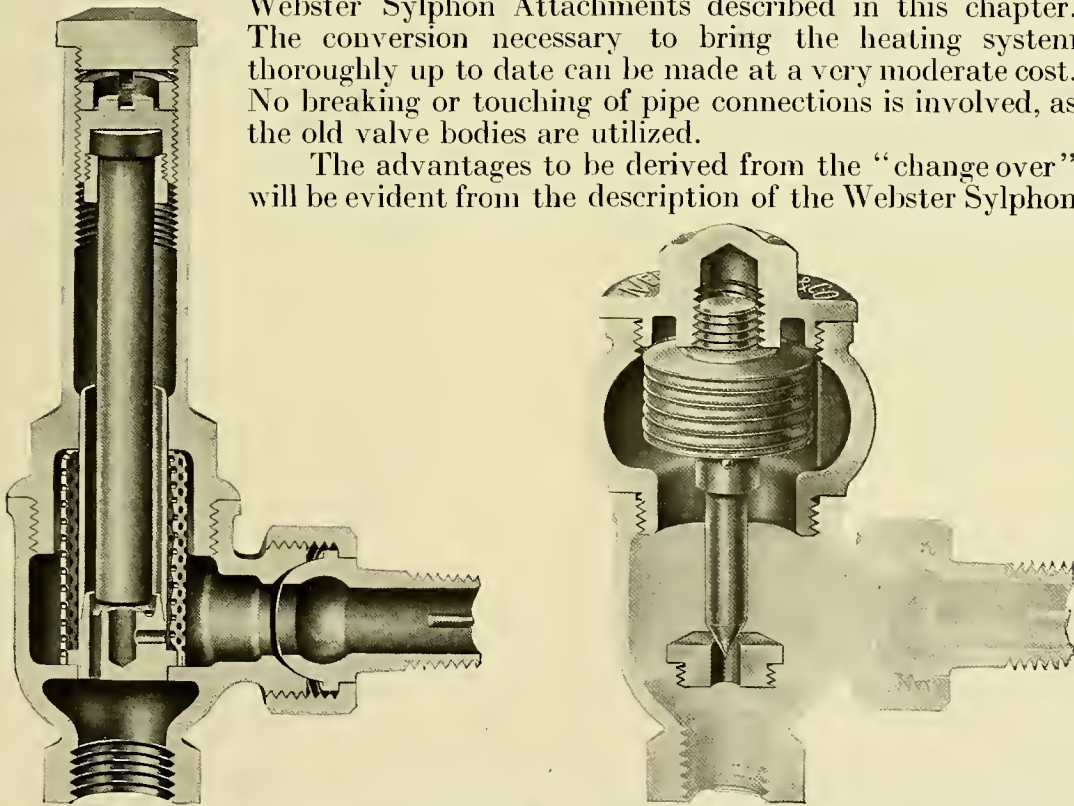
The No. 422 Thermostatic Valve in its original form and same valve changed over.
